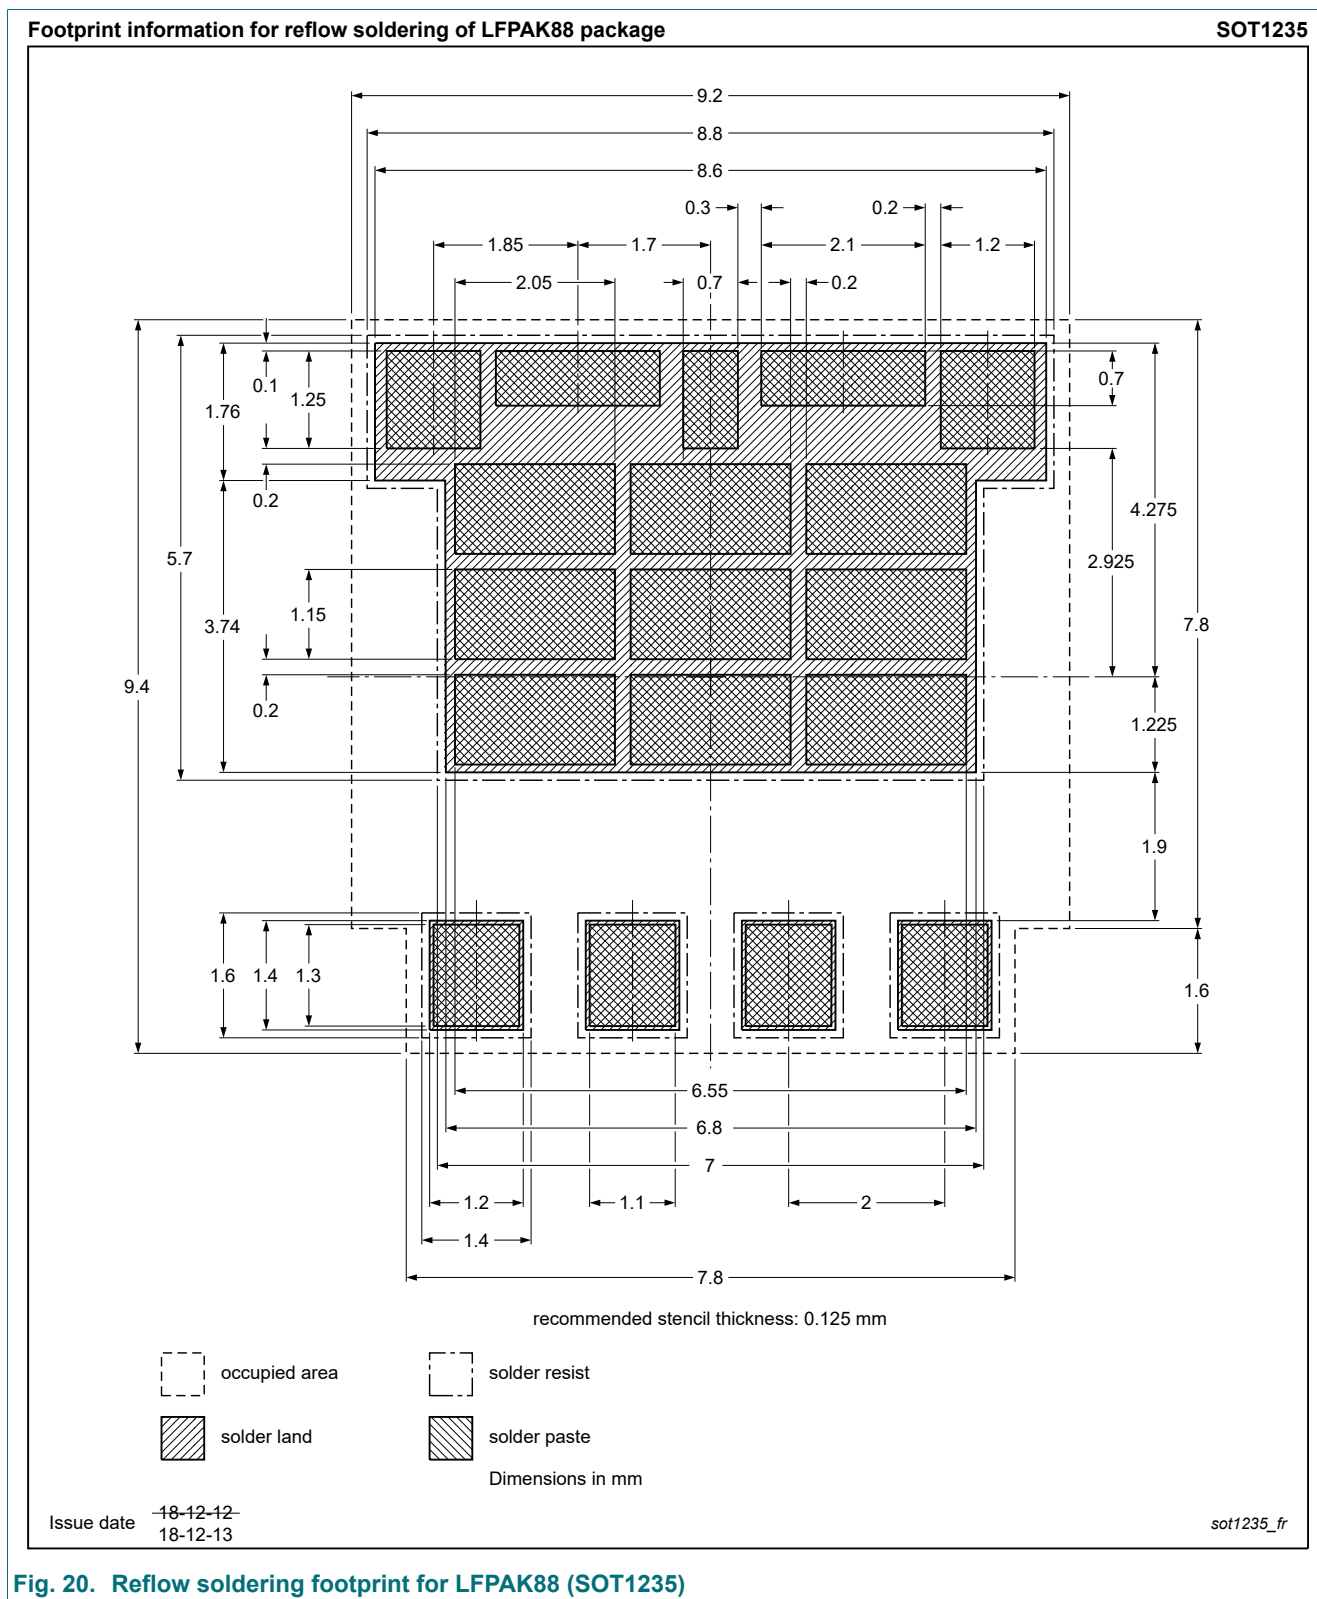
Reflow soldering footprint for LPAK88 (SOT1235)
